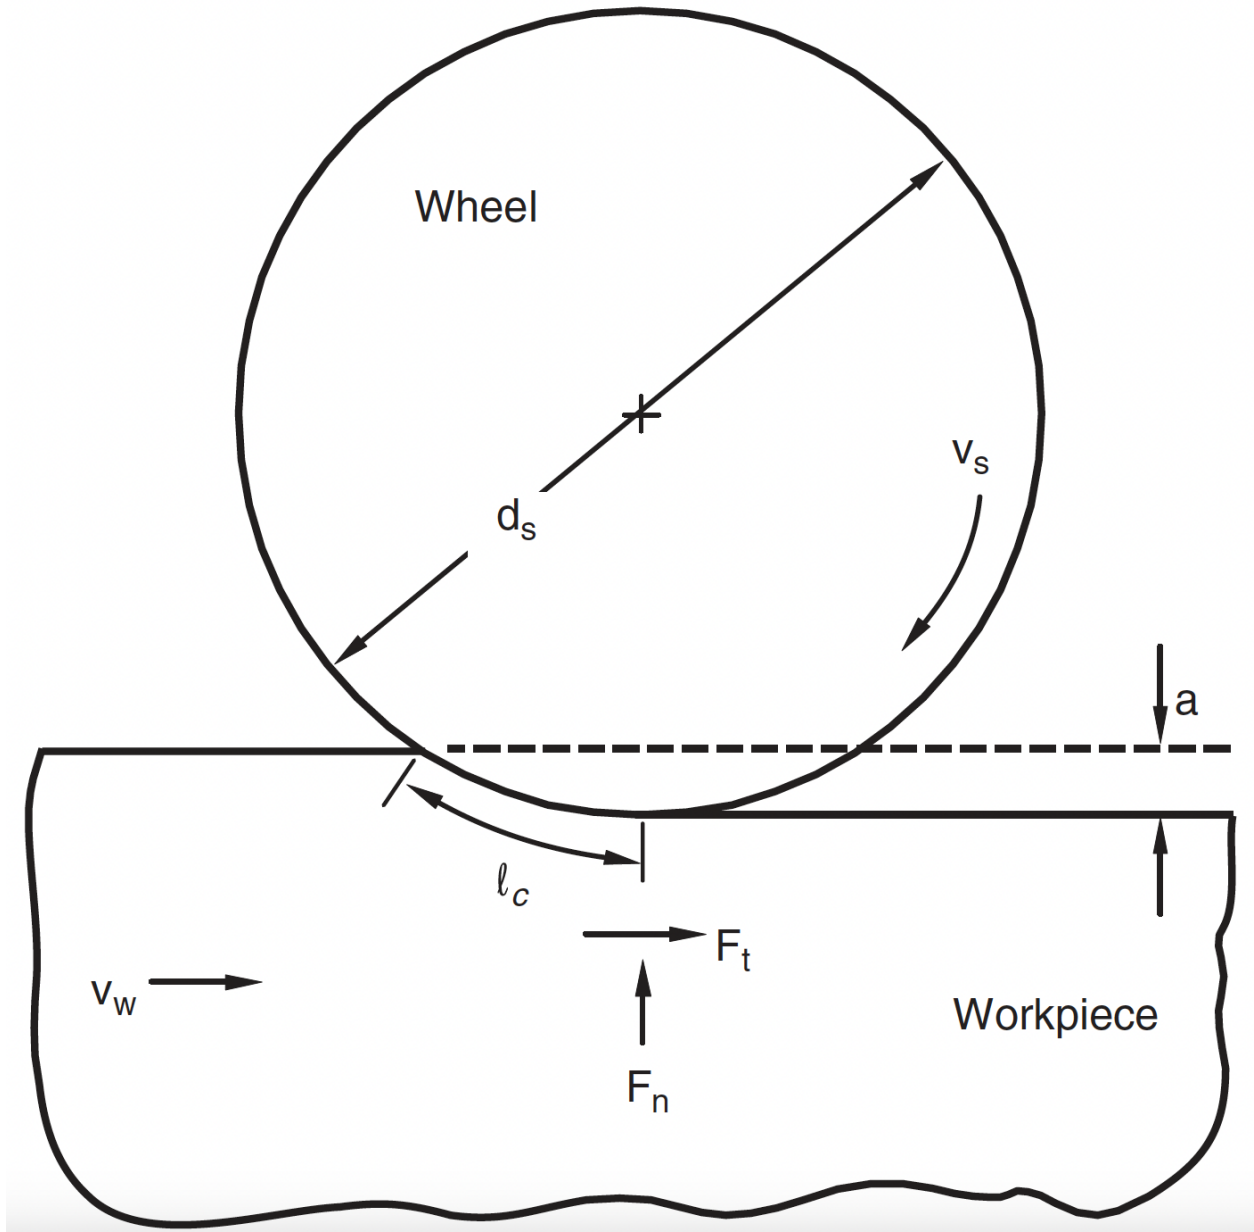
THE GEOMETRY OF SURFACE GRINDING AND ILLUSTRATION OF FORCE COMPONENTS
